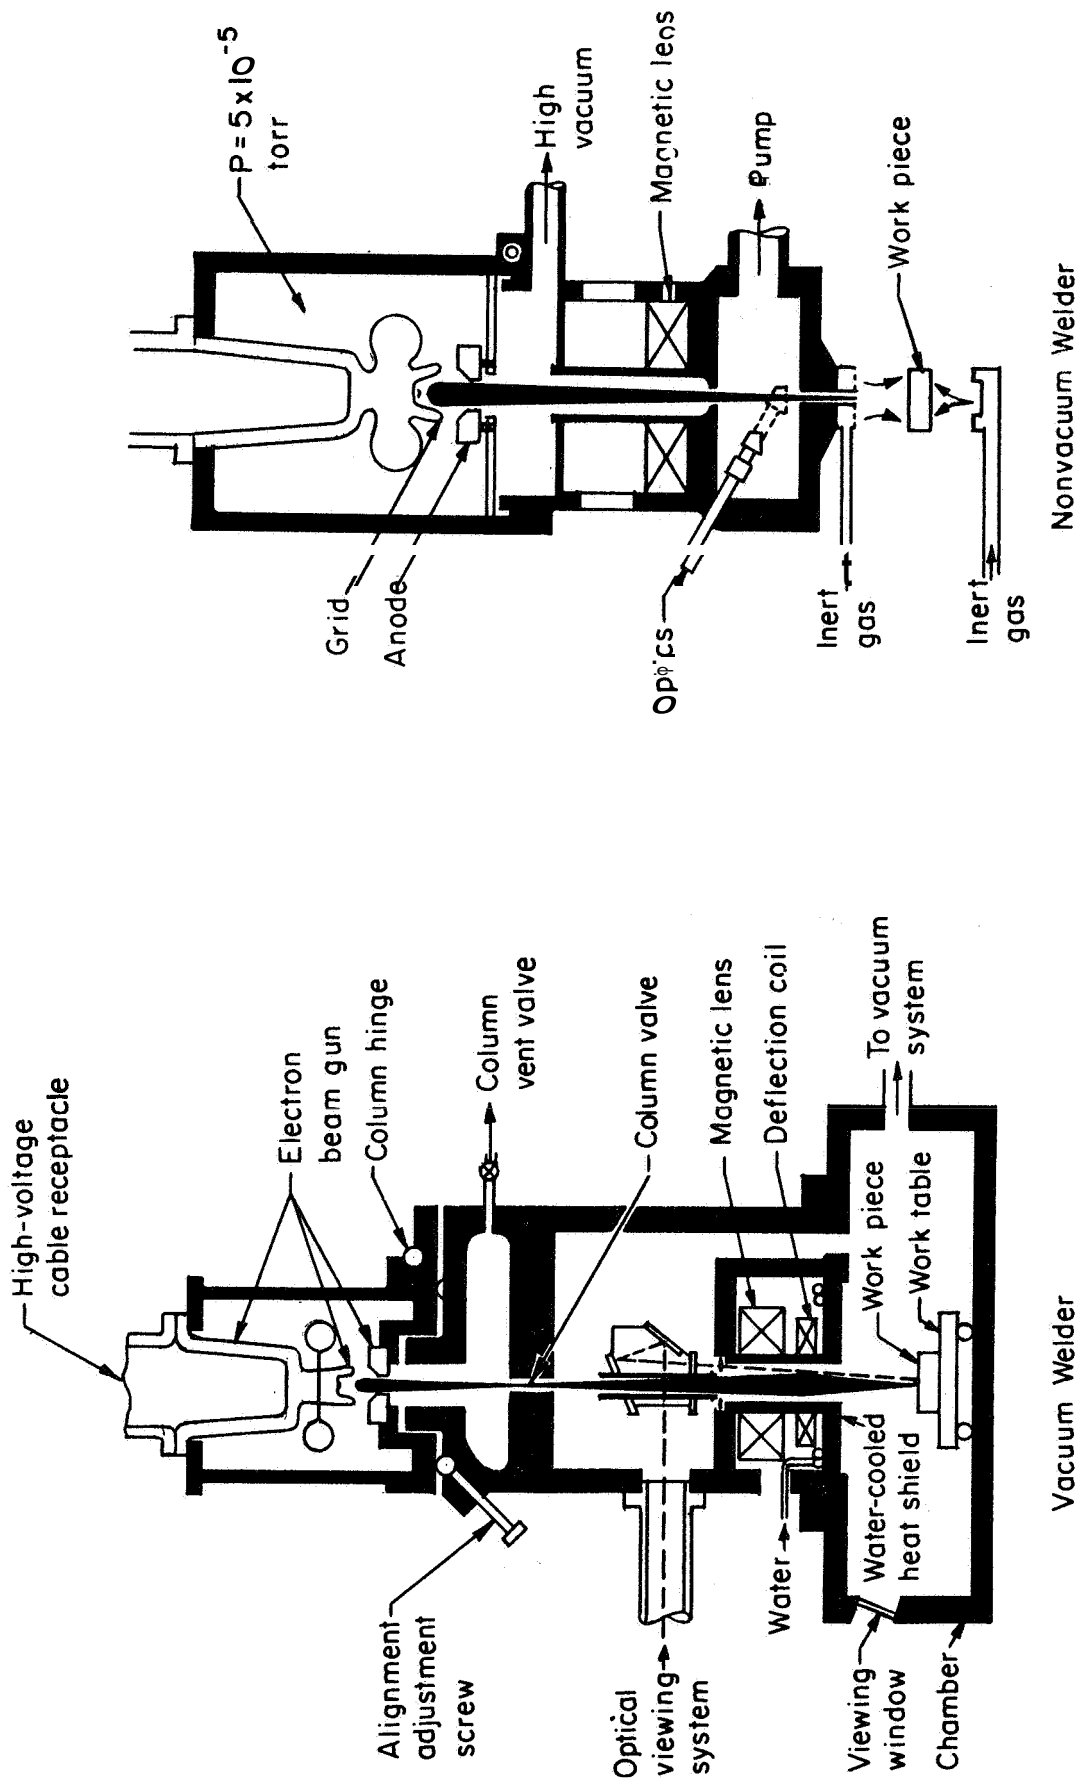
SKETCHES SHOWING TWO TYPES OF ELECTRON-BEAM WELDING MACHINES
